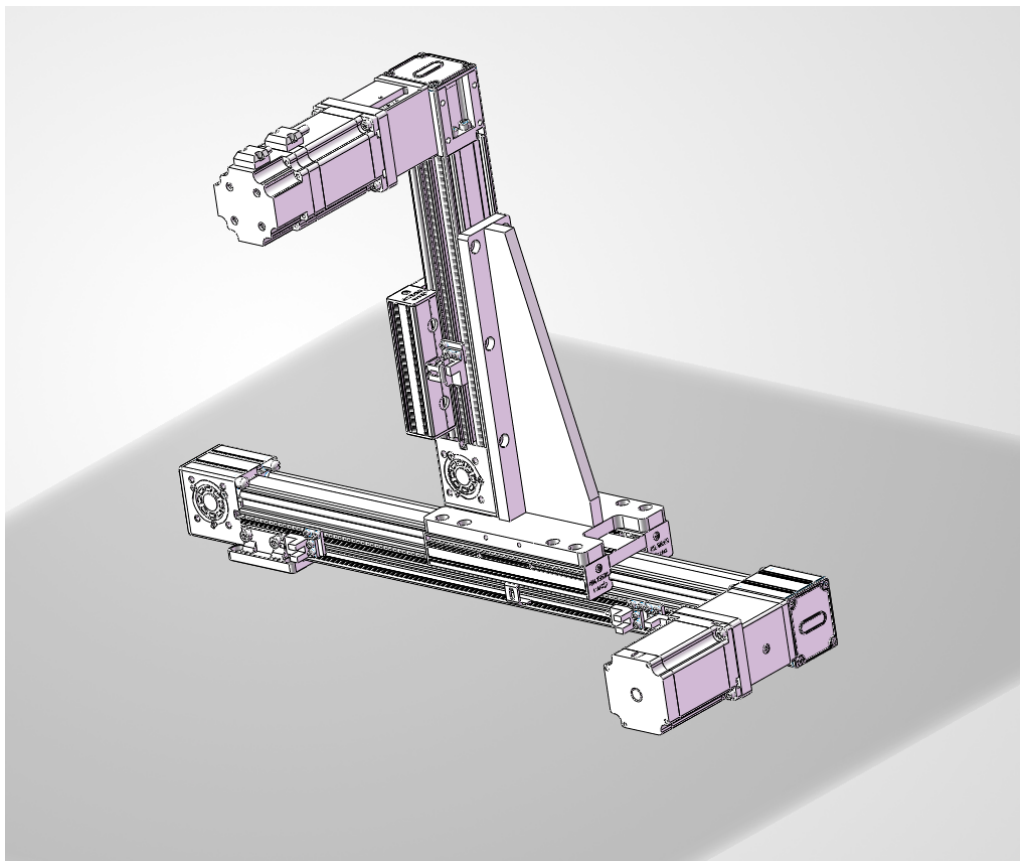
Detailed CAD model of the motion platform and vertical carriage used to plan the pusher mounting position, travel path, and mechanical clearance.
